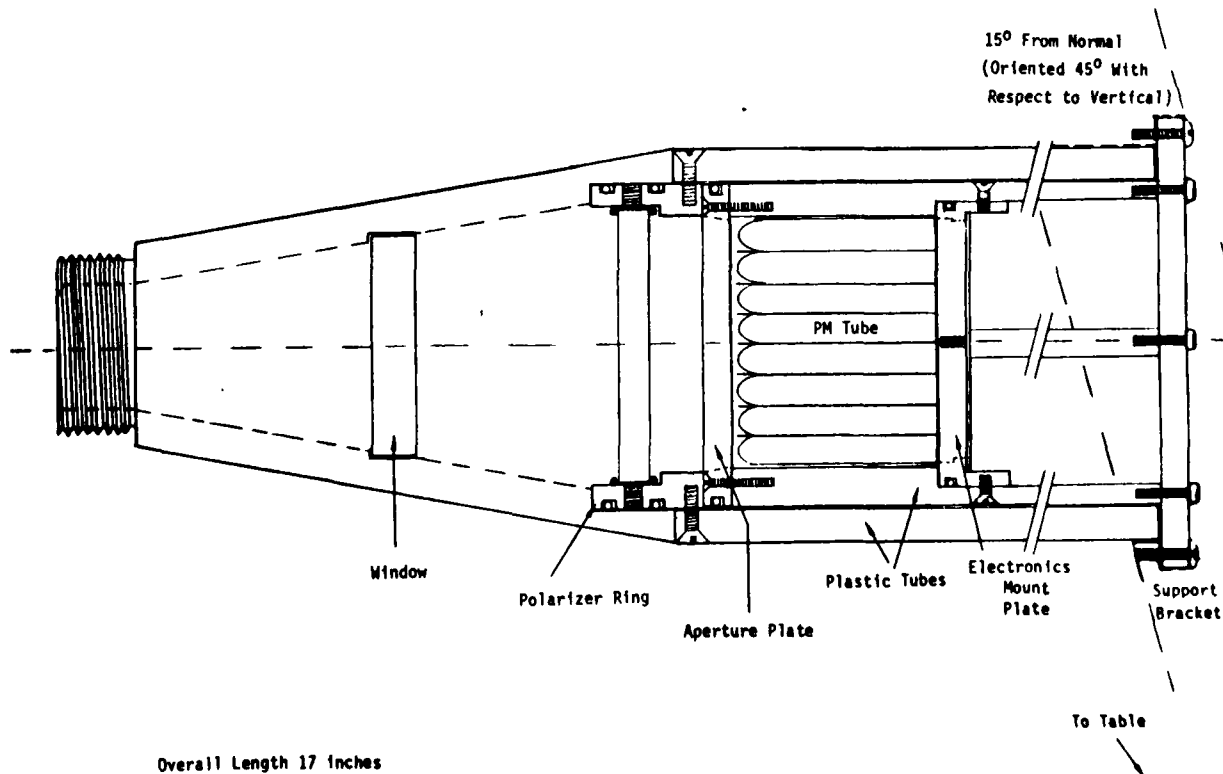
ARRAY DETECTOR ASSEMBLY OUTLINE DRAWING. Inner plastic tube is held fixed by the support bracket. Polarizer ring is mounted to outer plastic tube and rotates with it, relative to the PMT array.
